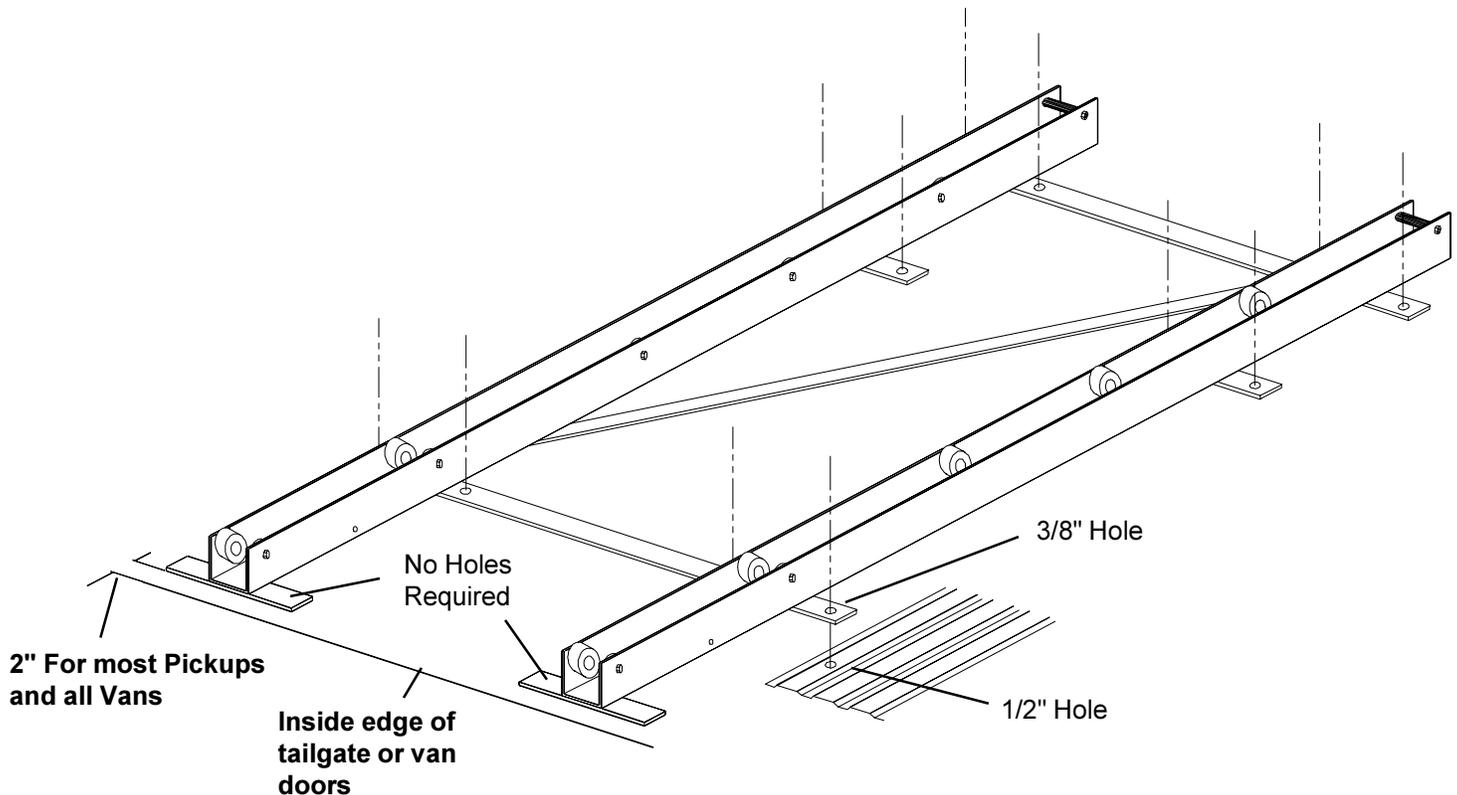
Base Assembly marking/drilling (Model 3400 shown)
